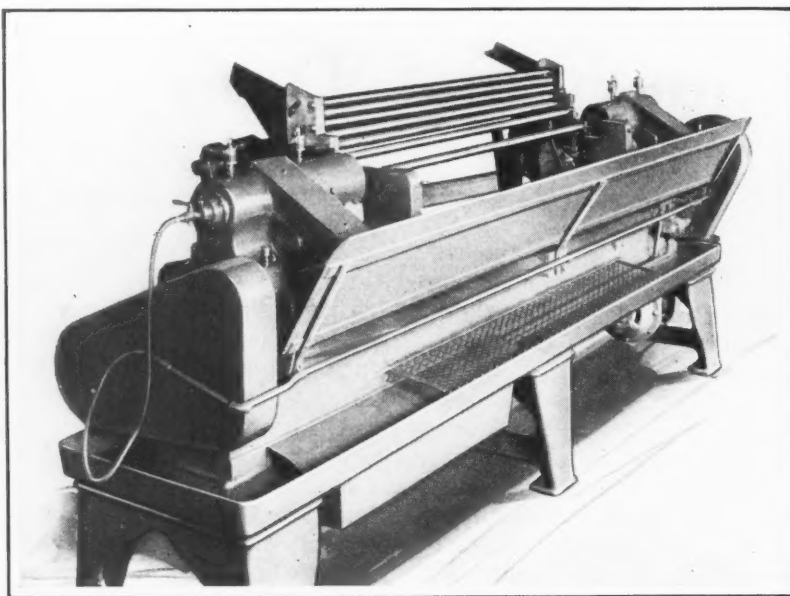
View of Threading and Chamfering Machine Showing how the Work is Held
